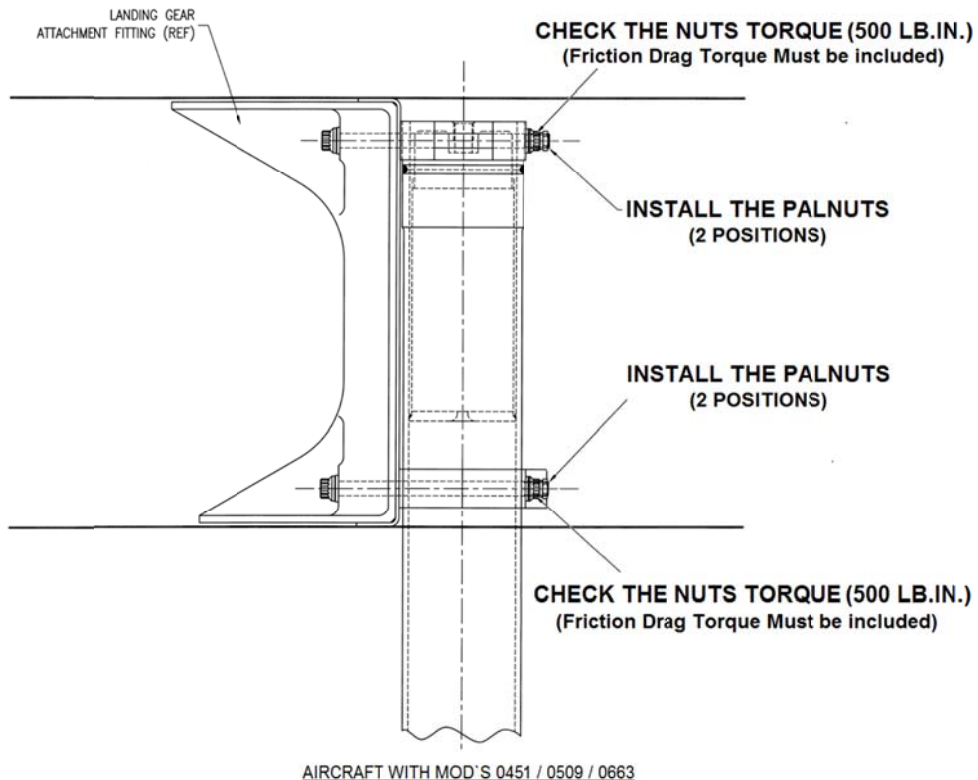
MAIN LANDING GEAR (AIRCRAFT WITH MODS 0451 / 0509 / 0663) – TORQUE CHECK AND PALNUTS INSTALLATION
